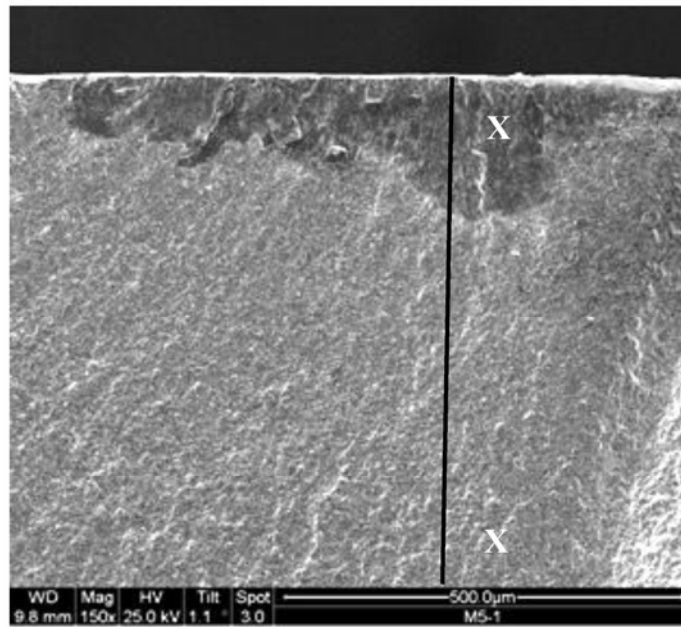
Typical fretting scar on specimen fractured from fretting fatigue.
